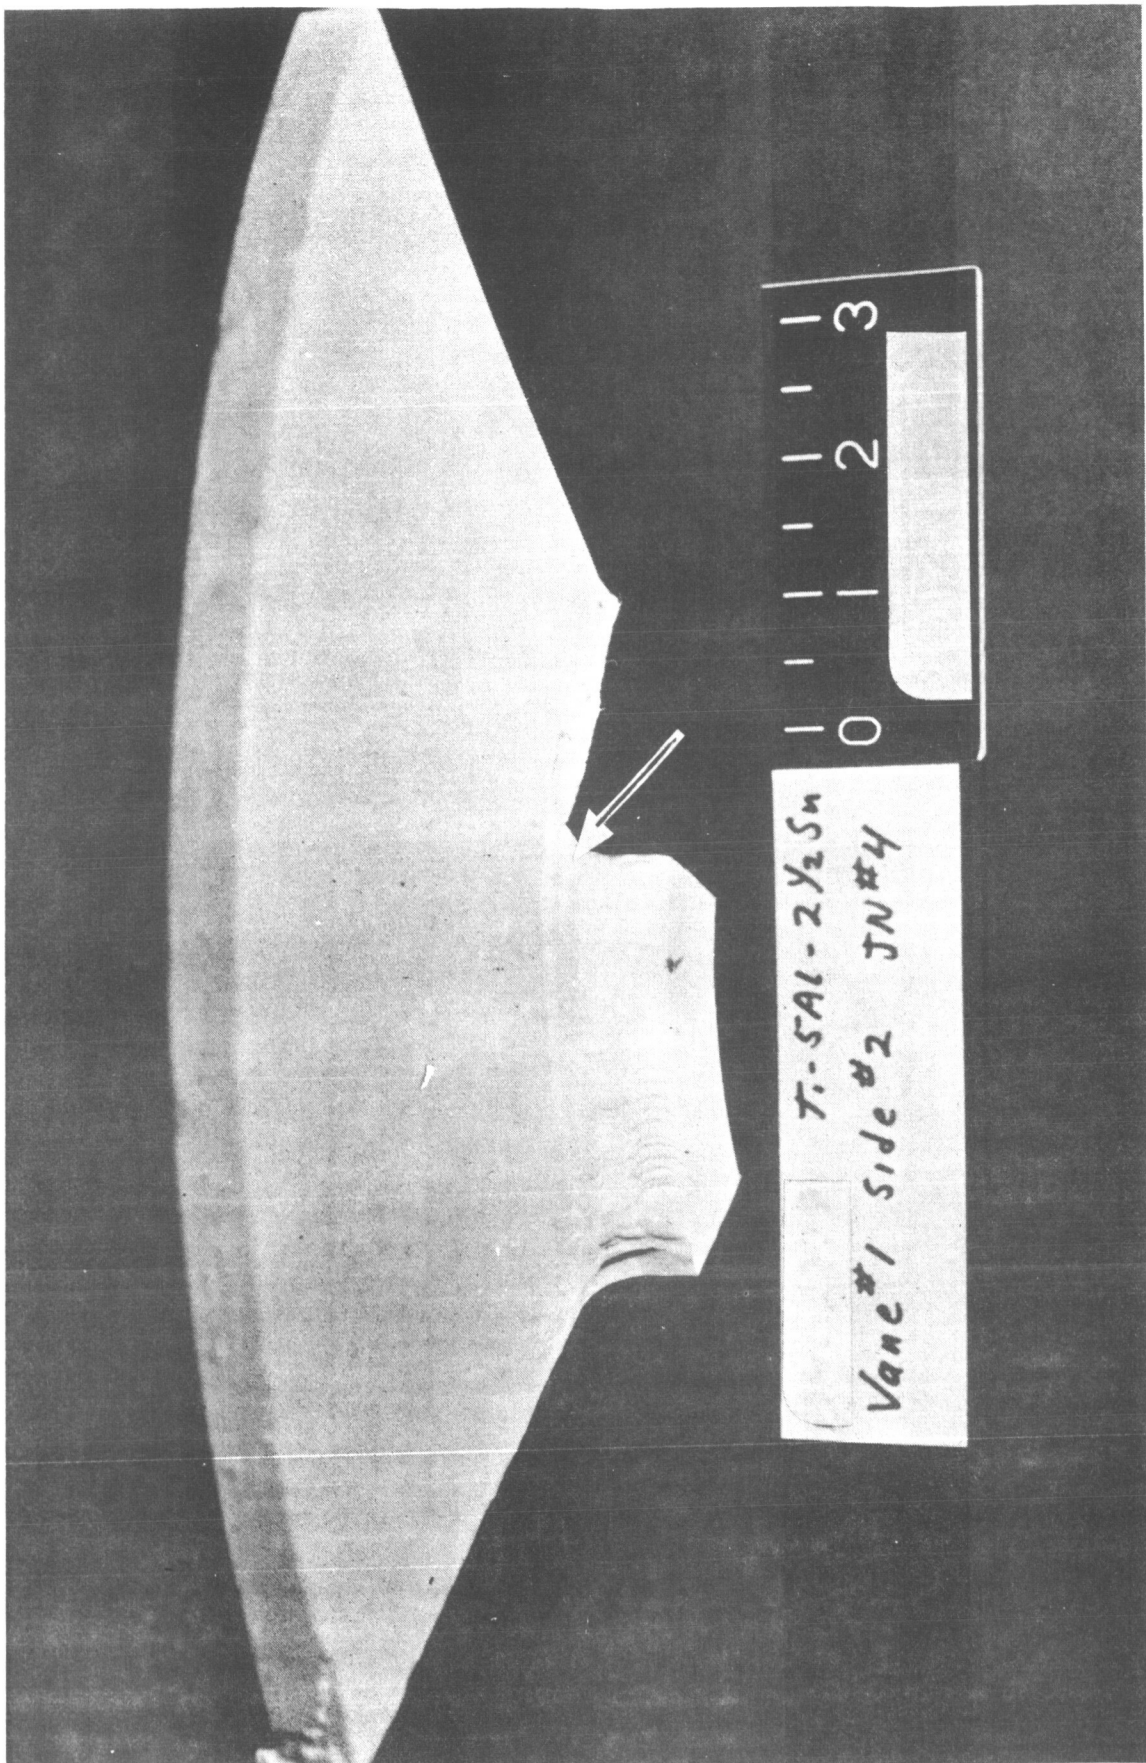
Cracked Weld in Dye-Penetrant Condition.
